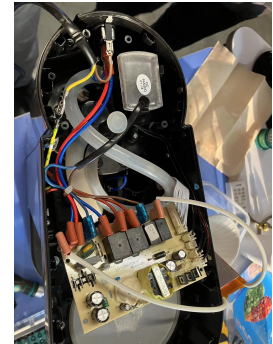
Detailed view of the electronic board and its connection to the pumping system.
